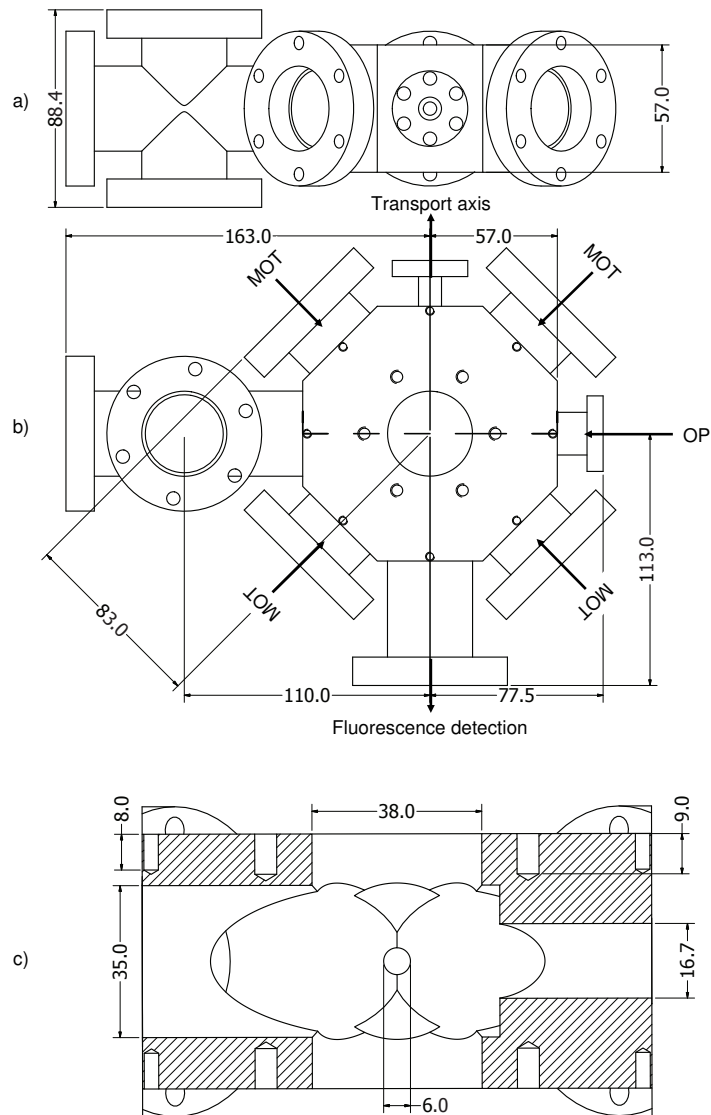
Drawing of the MOT chamber. All dimensions in mm. a) View on to the optical pumping port. The overall height of the compact MOT chamber is 57 cm. b) Bird's-eye view of the octagonal shaped MOT chamber. Four DN40 CF-flanges allow optical access for the MOT beams. A DN16 CF-flange gives optical access for the optical pumping beam, which is retro-reflected. Another DN40 CF-flange is used for fluorescence detection. c) Cross sectional view of the MOT chamber. Whilst allowing for 38 mm MOT beams the overall height of the system is minimized by using counter bored view ports on the top and bottom of the chamber. These are attached into the 9 mm deep thread leaving 2 mm of material. Additionally 8 mm deep tapped M4-holes have been put on to the chamber, which allows fixing of the MOT coils directly to the chamber. The hole along the transport axis is chosen to be 6 mm in diameter.
